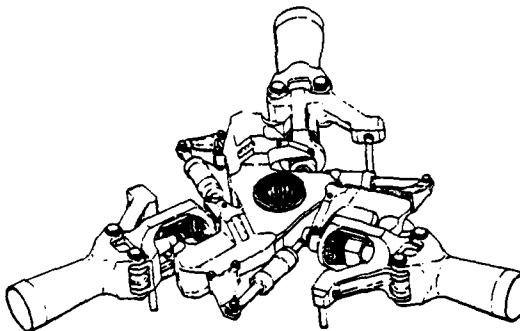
Three-bladed elastomeric-bearing rotor hub
